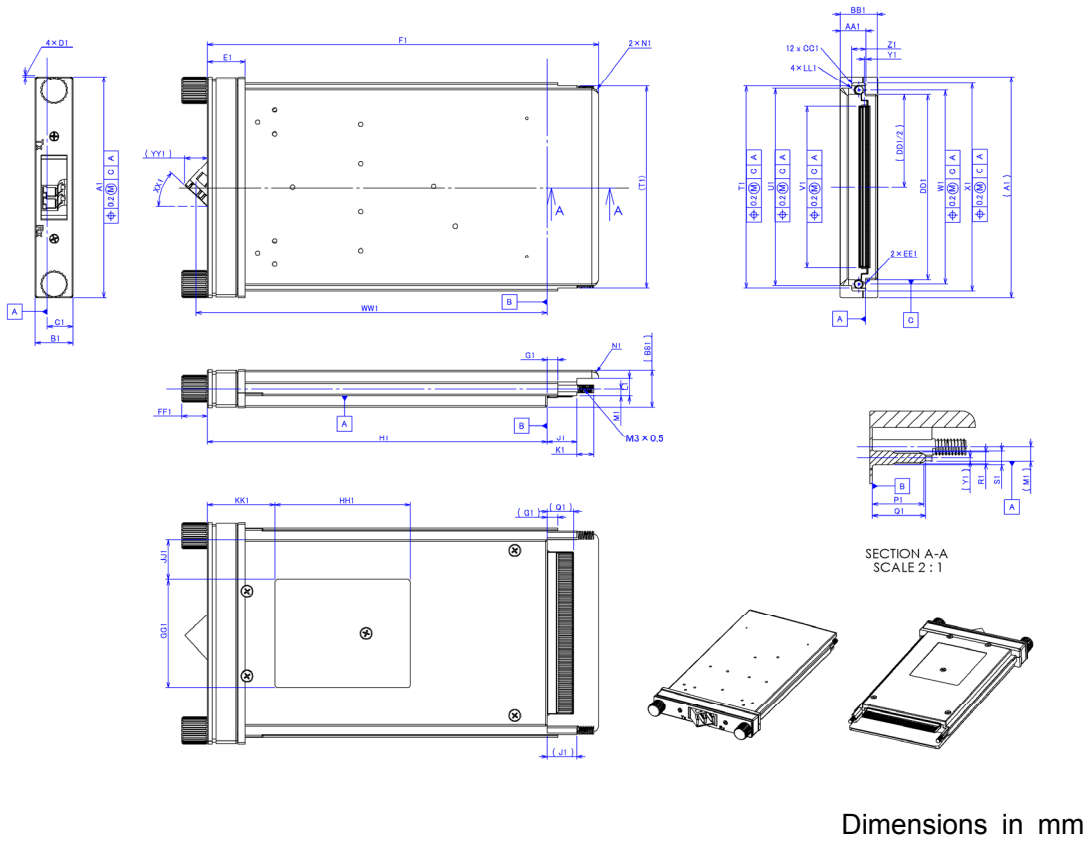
(c) LC Angled with Flat Top Package Drawing
